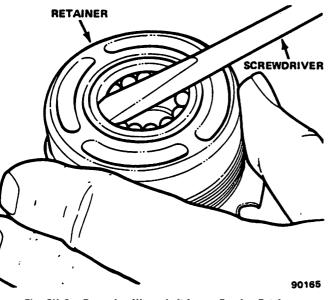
K-8 Removing Wormshaft Lower Bearing Retainer
